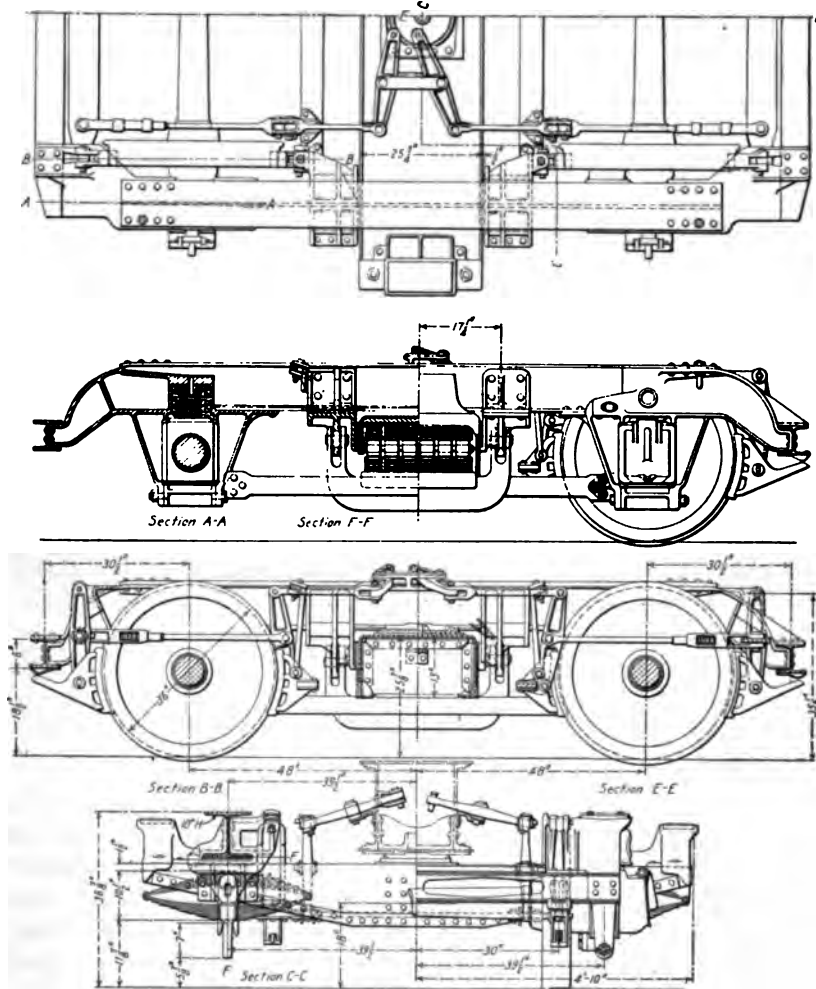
PRESENT STANDARD FOUR-WHEEL STEEL PASSENGER CAR TRUCK;
